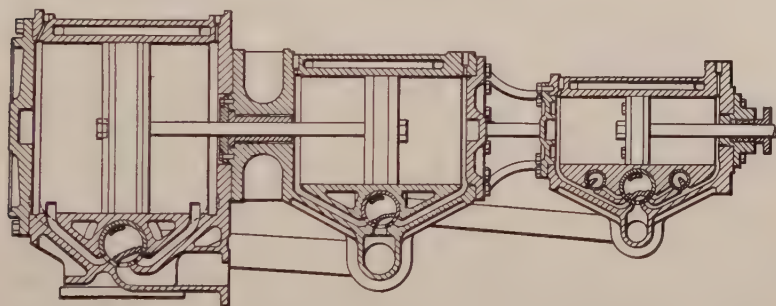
Worthington Triple-expansion Steam End with semi-rotative steam valves.
